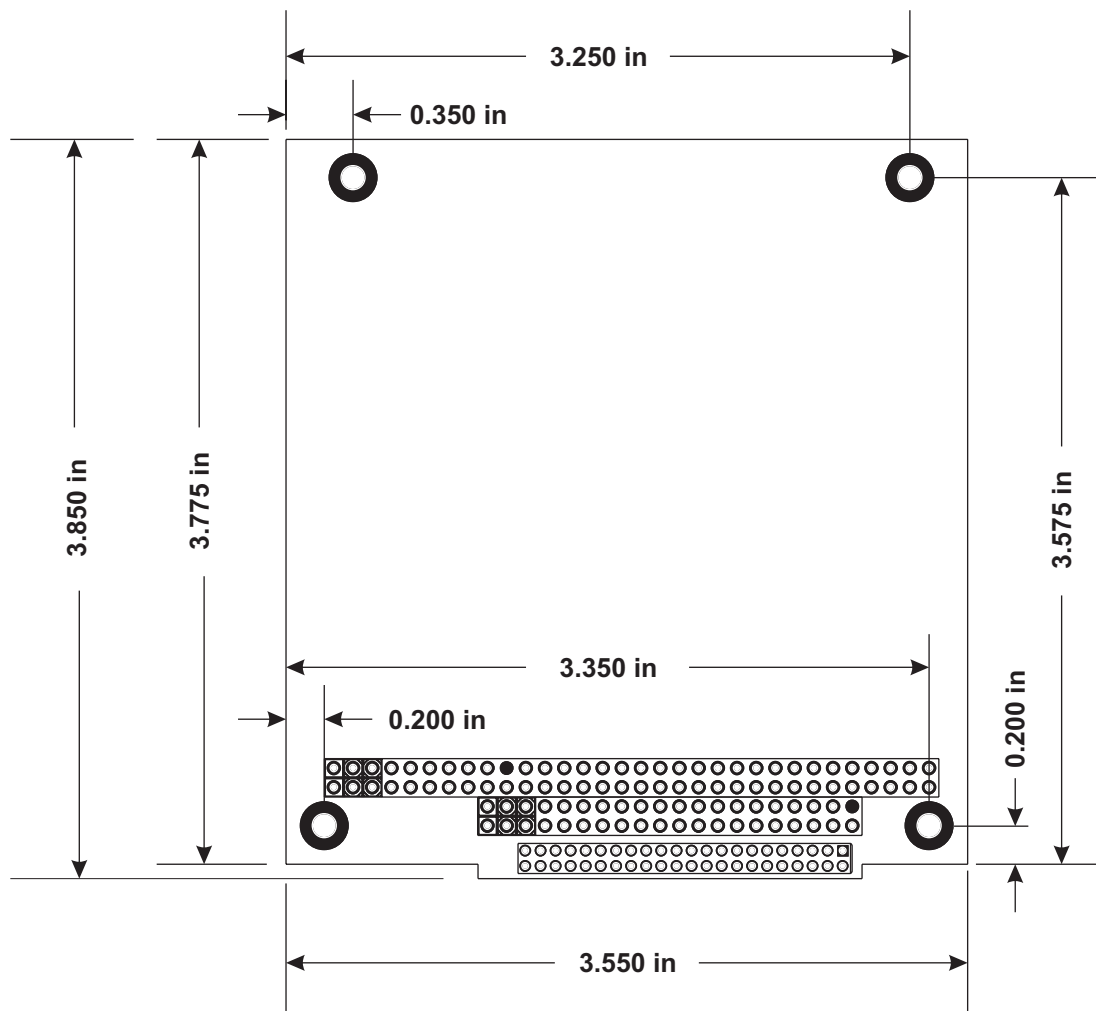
CMC26686CX Physical Dimensions (± 0.005 inches)
